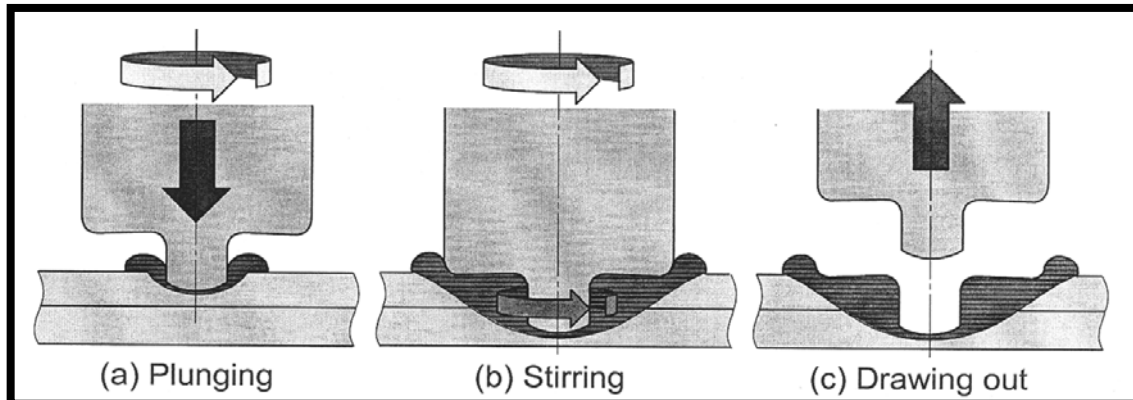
Frictions Stir Spot Welding Process [M.Awang,2005].
